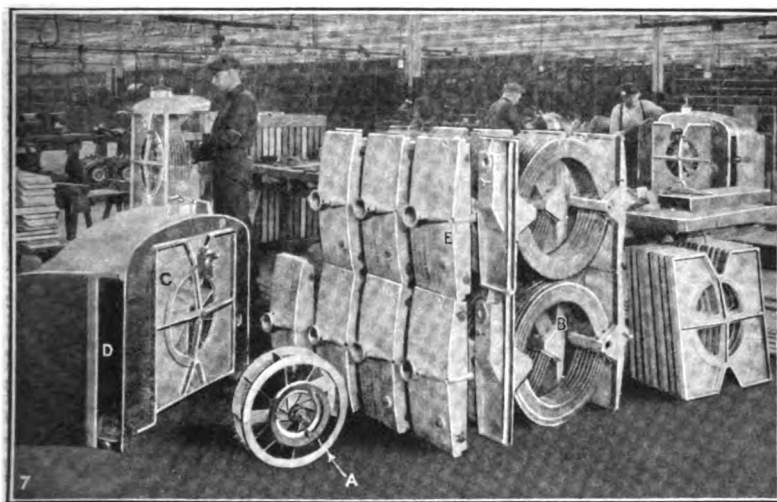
RADIATOR READY TO ASSEMBLE. FIG. 8. TESTING THE FAN BELTS
